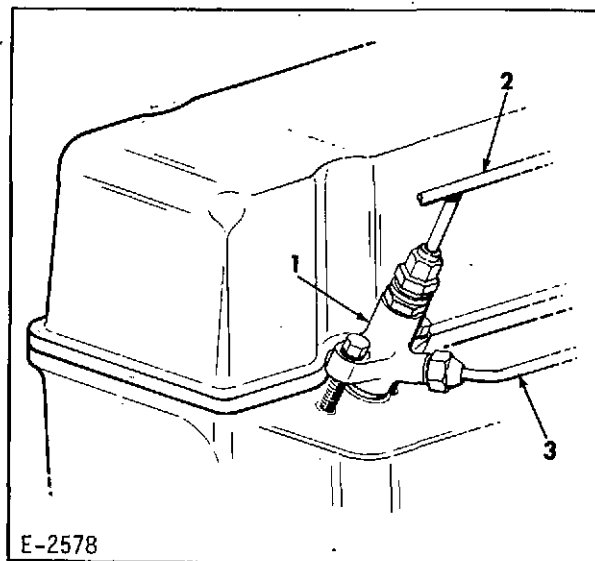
Fuel Injection Nozzle Holder Dowel Location
